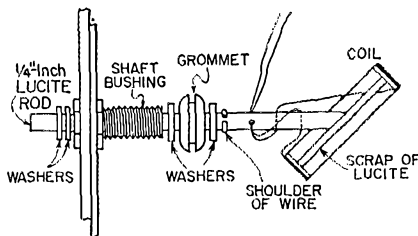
Details of the adjustable antenna coupling coil. Part of the coil has been cut away to show the support.
